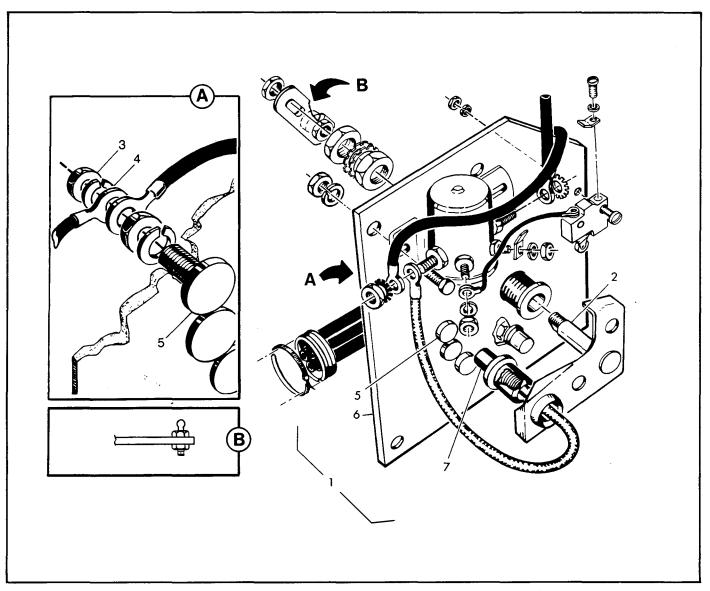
ACCELERATOR SWITCH ASSEMBLY
